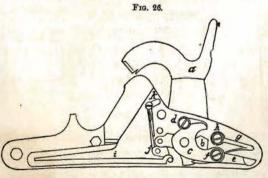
Lock, inside view, half size, showing the parts with the hammer at half cock. a, hammer; b, tumbler; c, bridle; d, bridle-screw; e, sear, ; f, sear-screw; g, sear-spring; h, sear-spring; j, swivel; k, covercatch.
